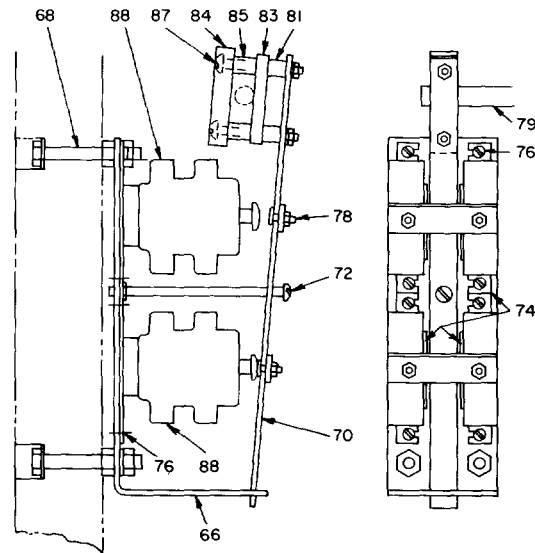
Cat. 112B9742G1, -G2, -G3 or -G4 parts
